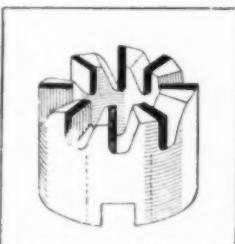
Hollow mill whose Widia cutting elements are brazed on a high-carbon steel body.
